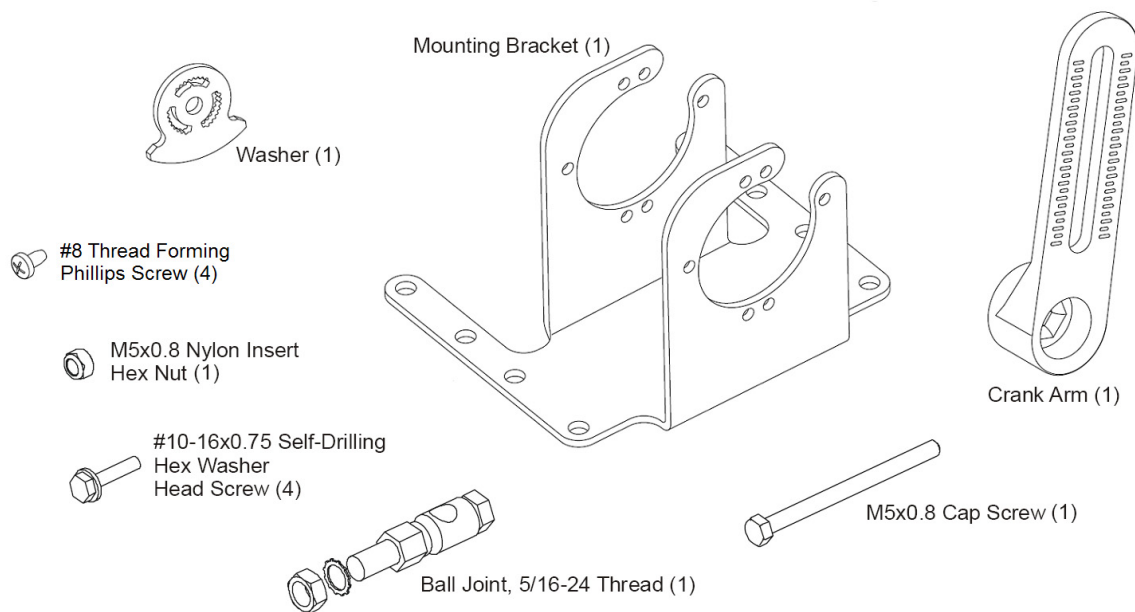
Parts included in M9203-100 Remote Mounting Kit
